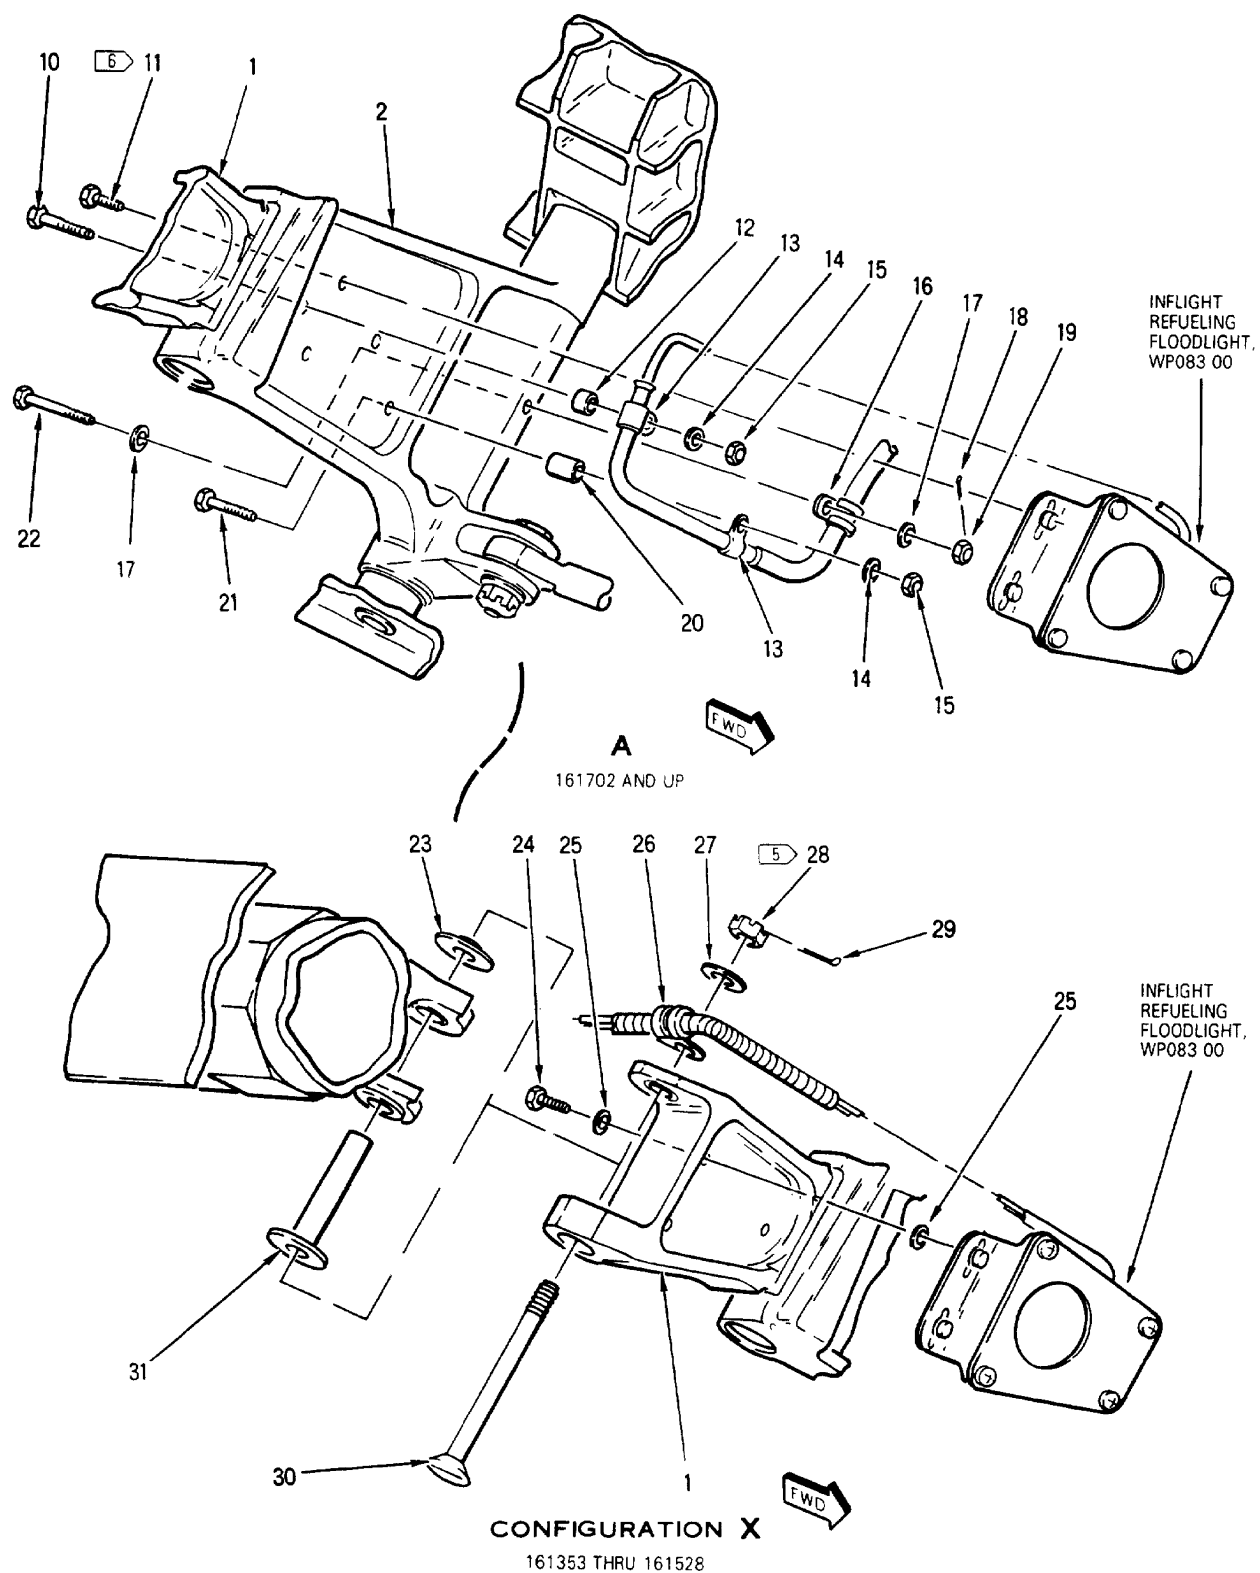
Inflight Refueling Probe and Door Drive Mechanism (Sheet 4)
